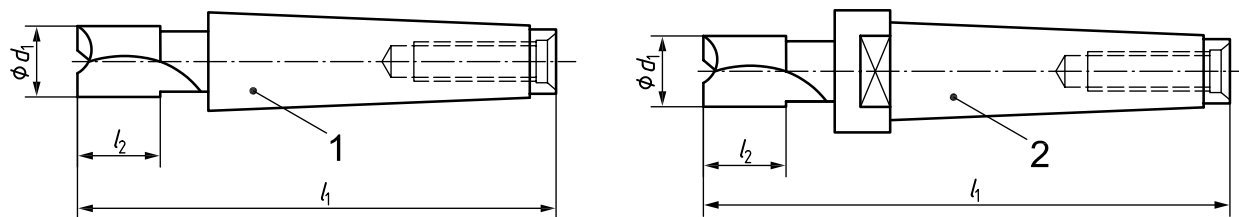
Dimensions of flat-ended end mills and ball-nosed cylindrical end mills
